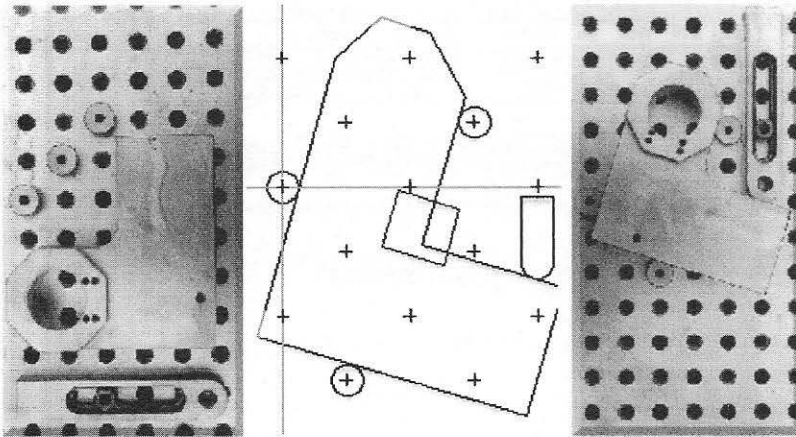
Modular fixturing system. Left: three circular fixture elements (fixels) and a sliding clamp are shown on a regular lattice of mounting holes. The L-shaped bracket is a typical industrial part. Center: a geometric fixture found by *FixtureNet*. Right: the corresponding fixture and L-shaped bracket.
